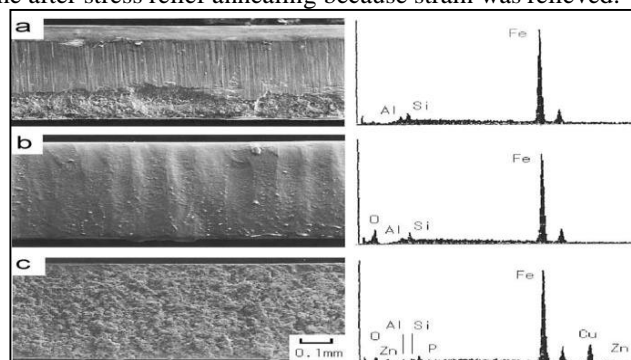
Appearance of the cut edges: (a) Shearing, (b) Laser Cutting, and (c) WEDM^[18]
